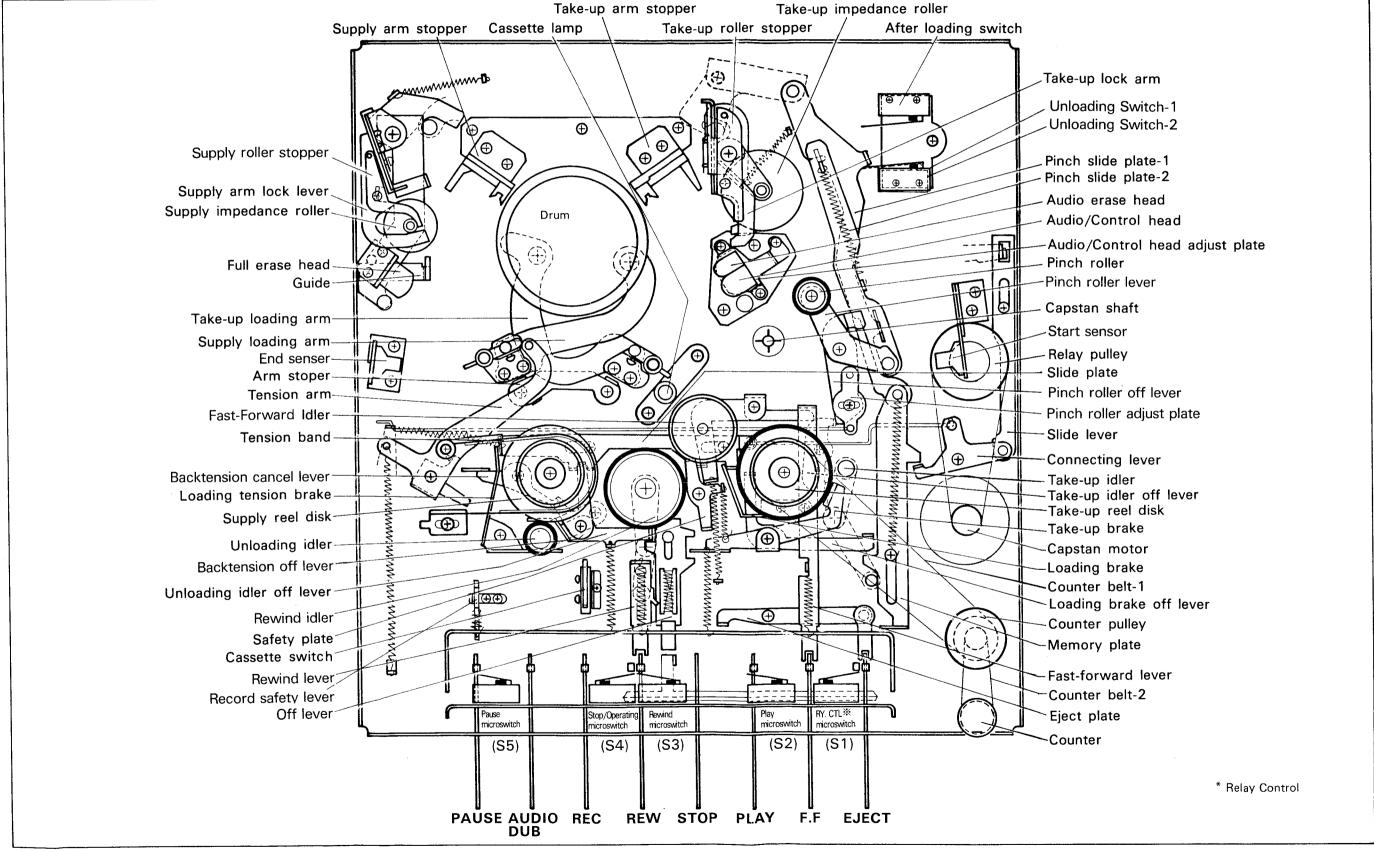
(a) STOP mode mechanism (TOP VIEW)
